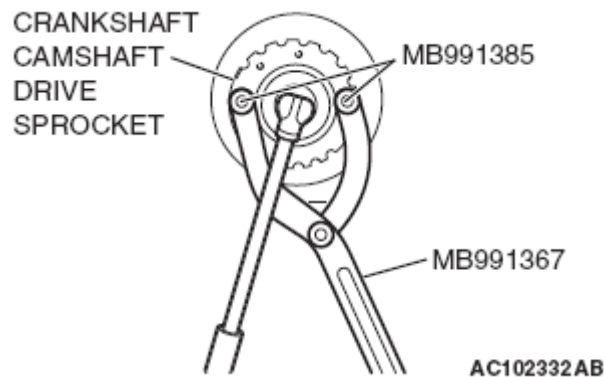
Holding Crankshaft Camshaft Drive Sprocket
